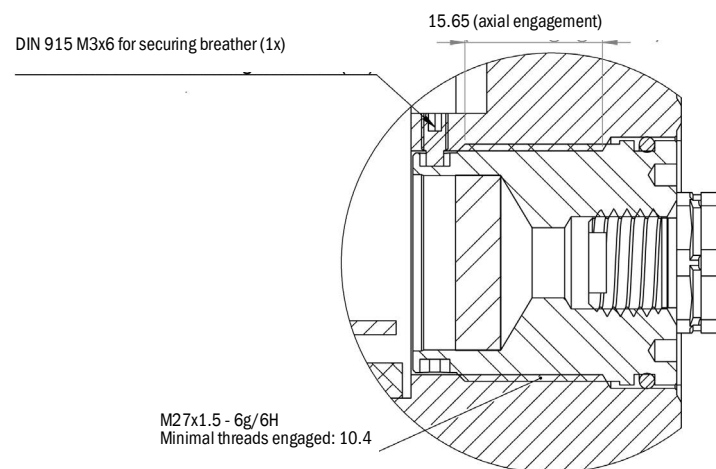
Threaded flame path between Ex breather and Ex enclosure body
